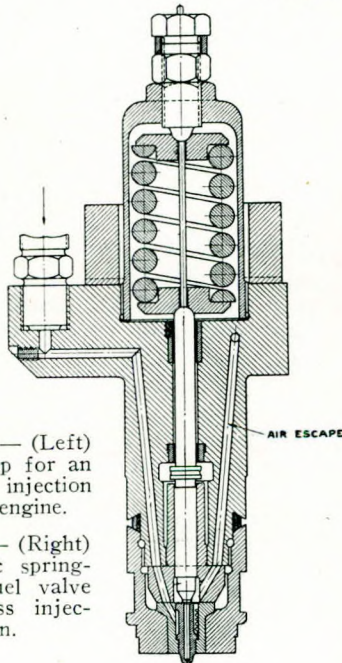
(Right) Automatic spring-loaded fuel valve for airless injection.
